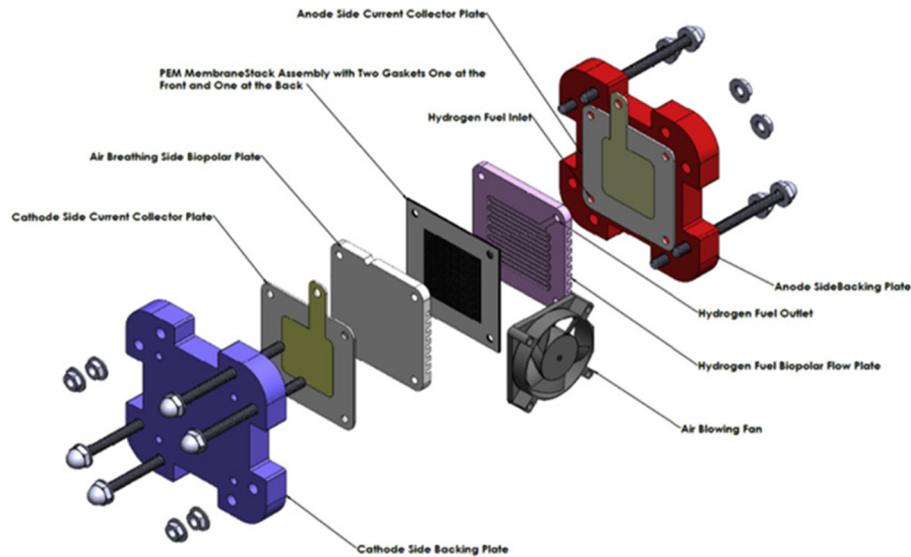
Exploded view of proton exchange membrane fuel cell (PEMFC).
